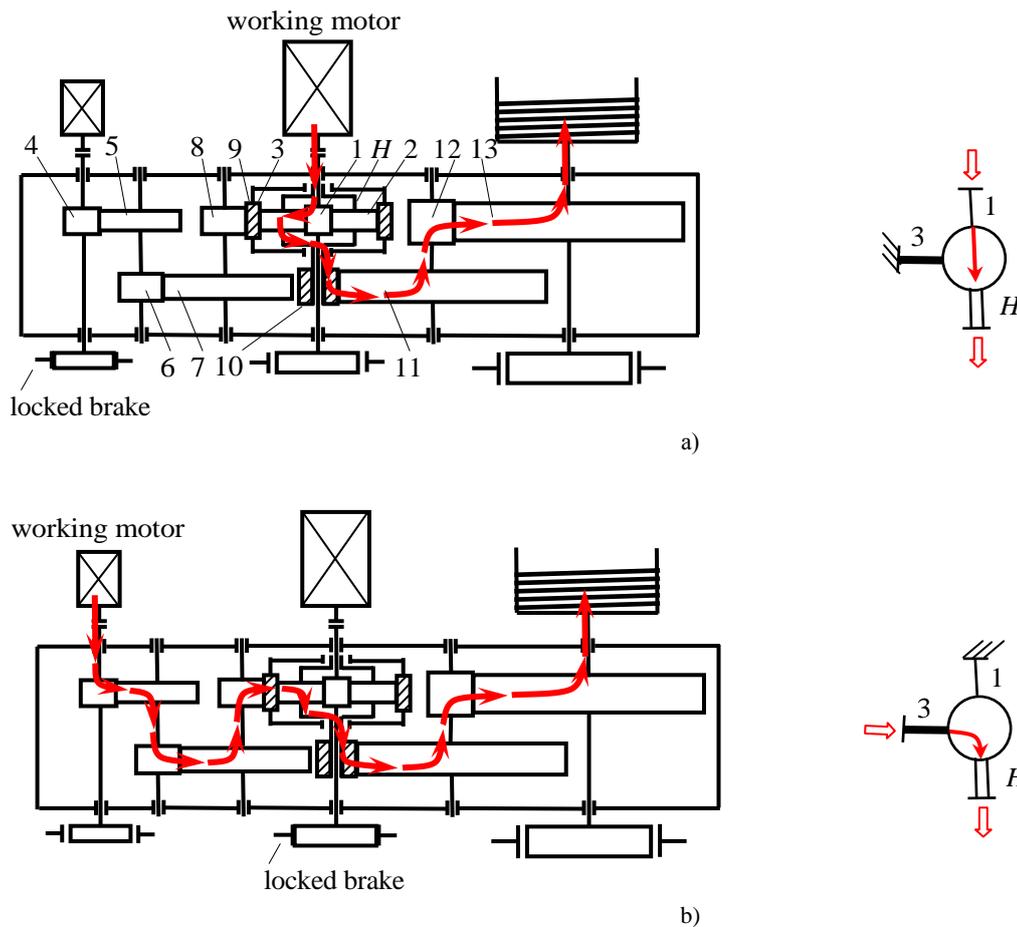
Operation of AI-PGT as a stage of a two-speed gearbox of a hoisting mechanism [3, 5]
